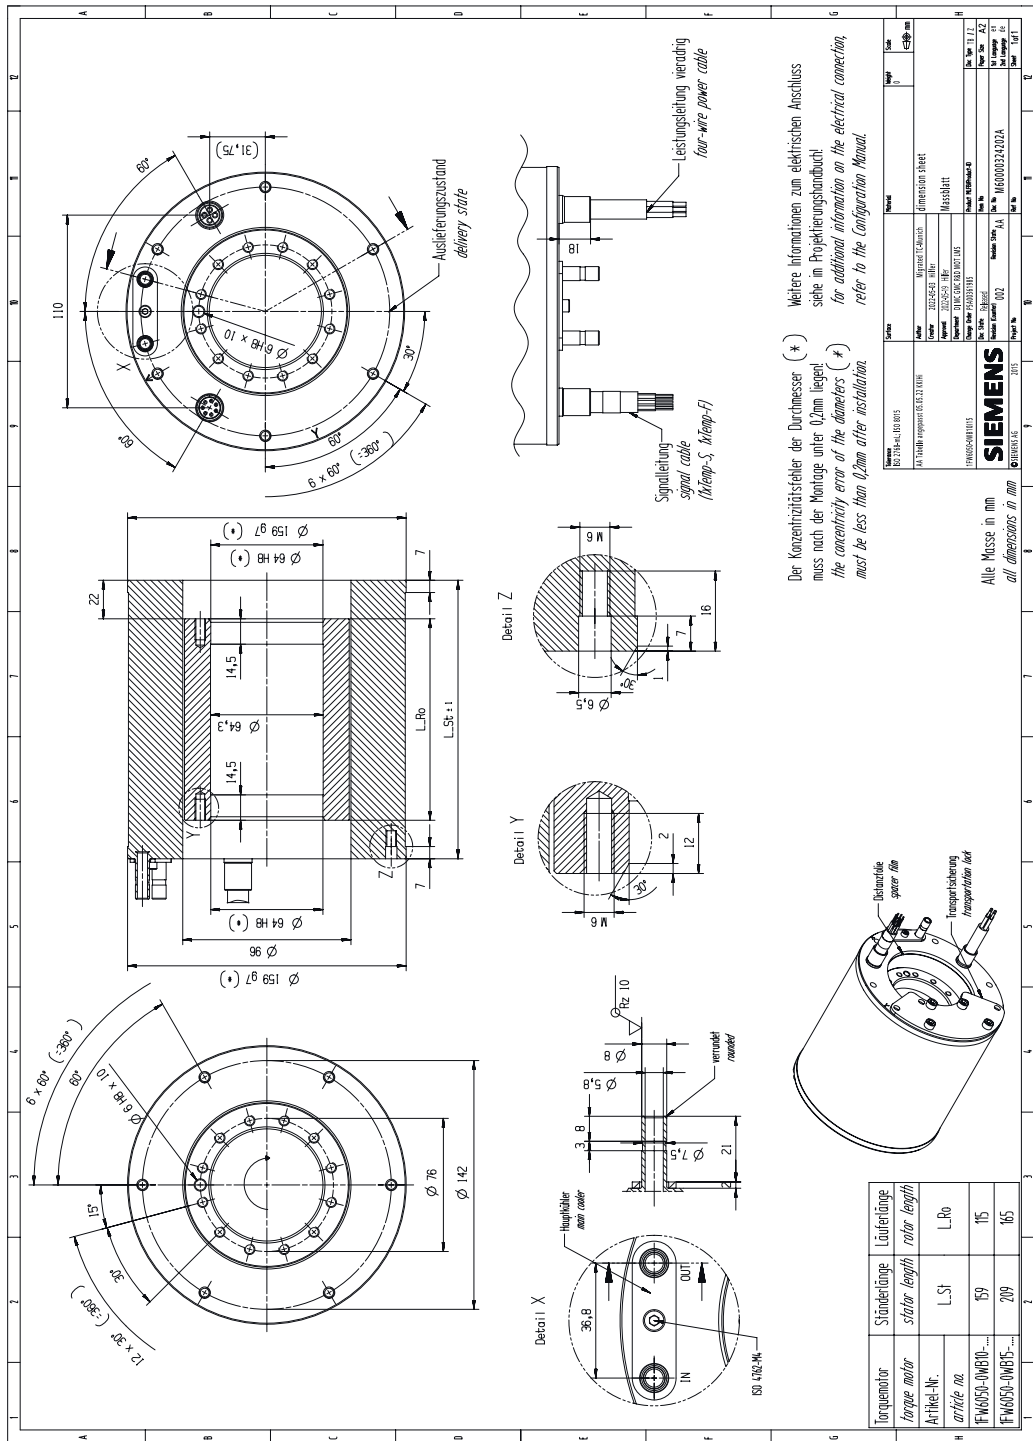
1FW6050-xxB (active part length 10 and 15, axial electrical connection with sleeve)
